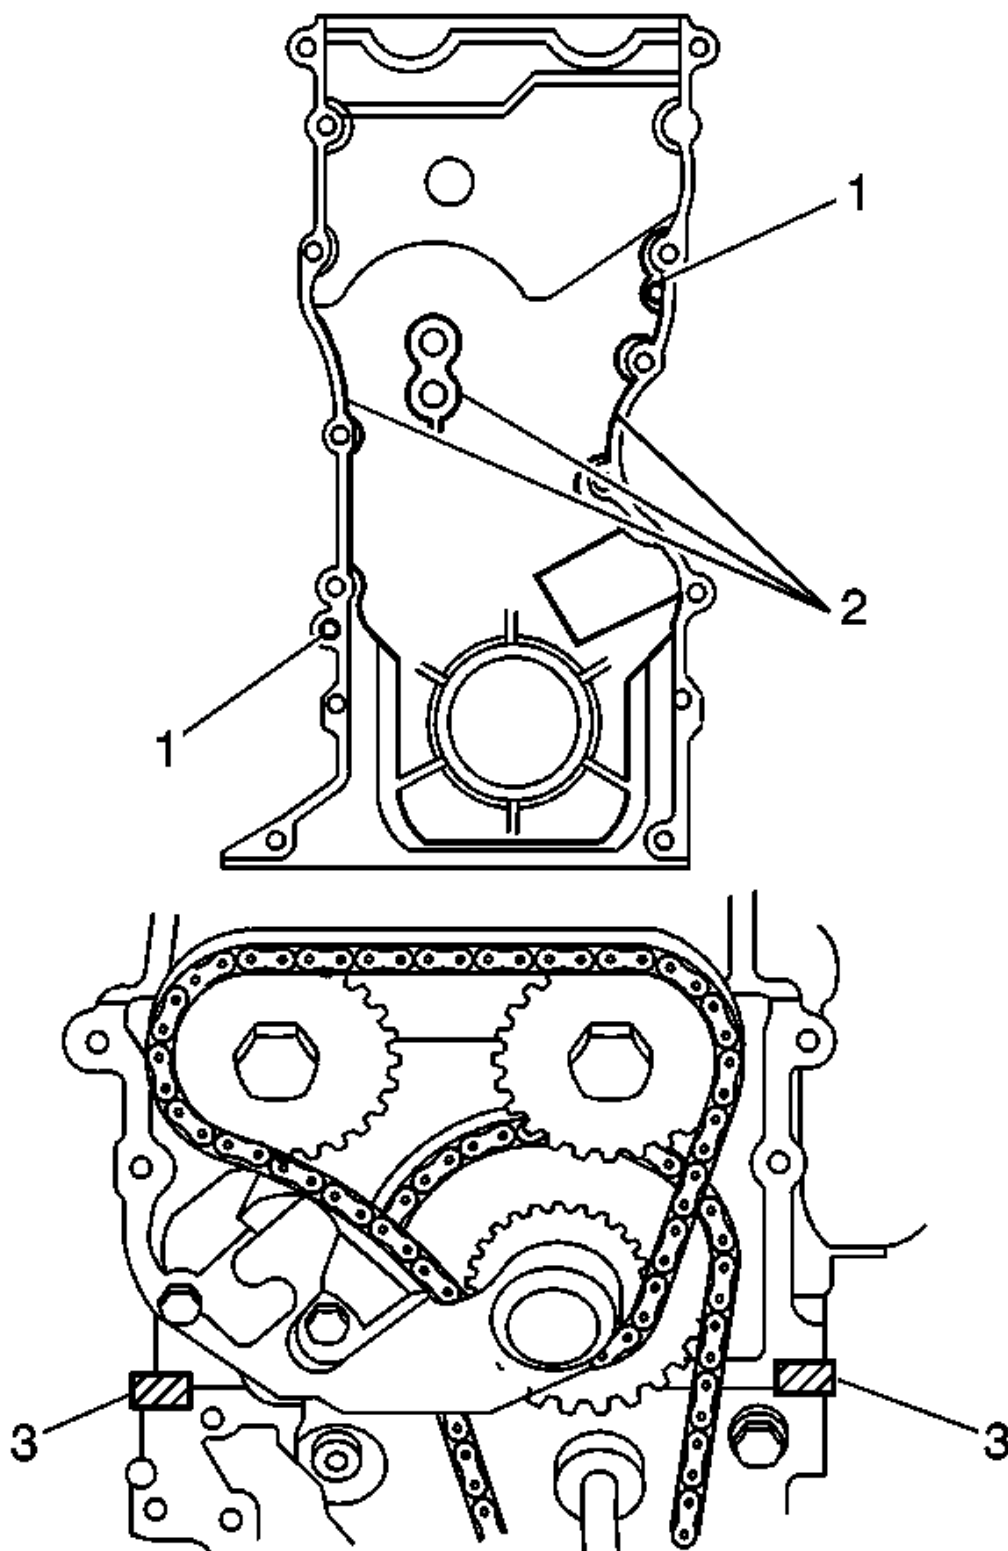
View Of Timing Cover Mating Surface & Cylinder Head-To-Engine Block Mating Points
